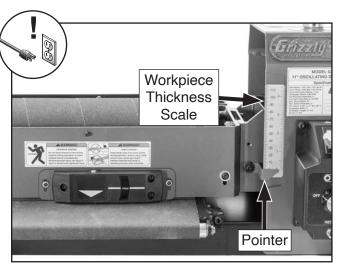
Sanding drum adjusted down to zero workpiece thickness scale.
